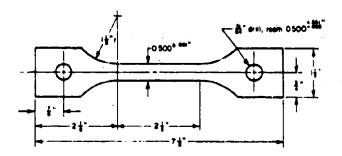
SHEET AND THIN-PLATE TENSILE SPECIMEN
